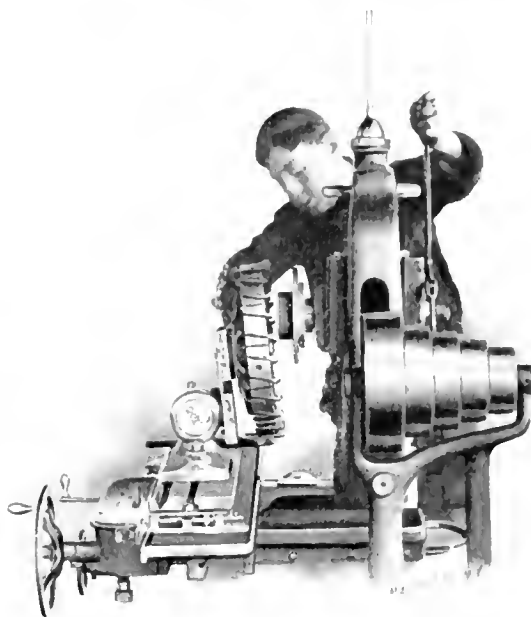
Grinding an Inserted Tooth Face Milling Cutter
